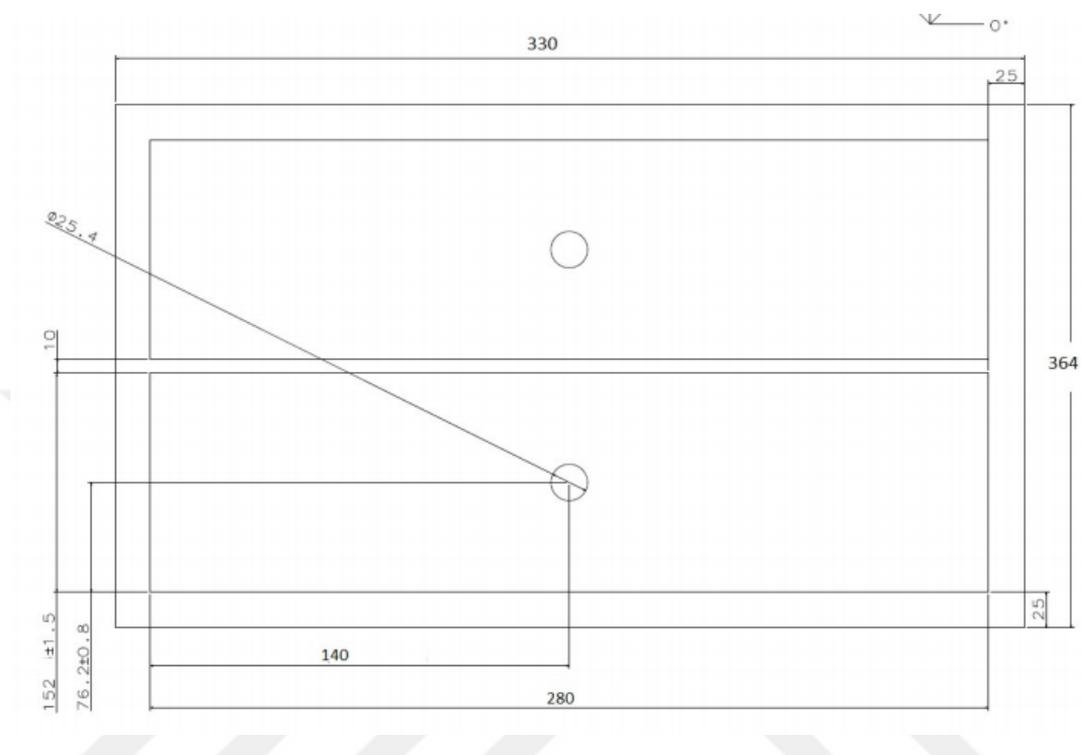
Carbon fiber prepreg plate before drilling the hole
